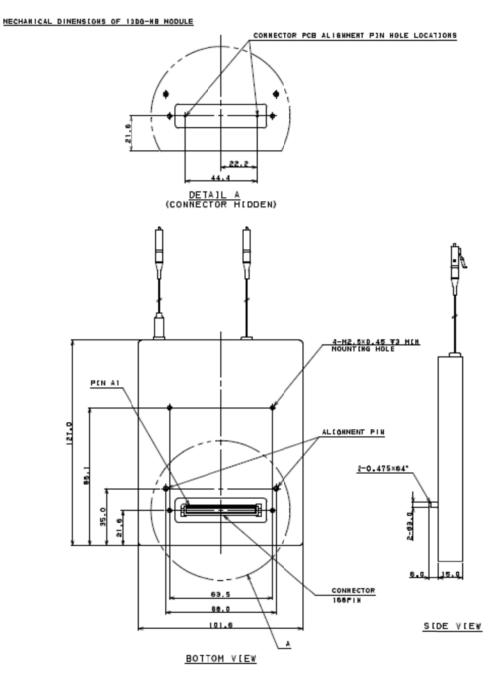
MSA-100GLH Flattop mechanical dimensions - bottom/side views
